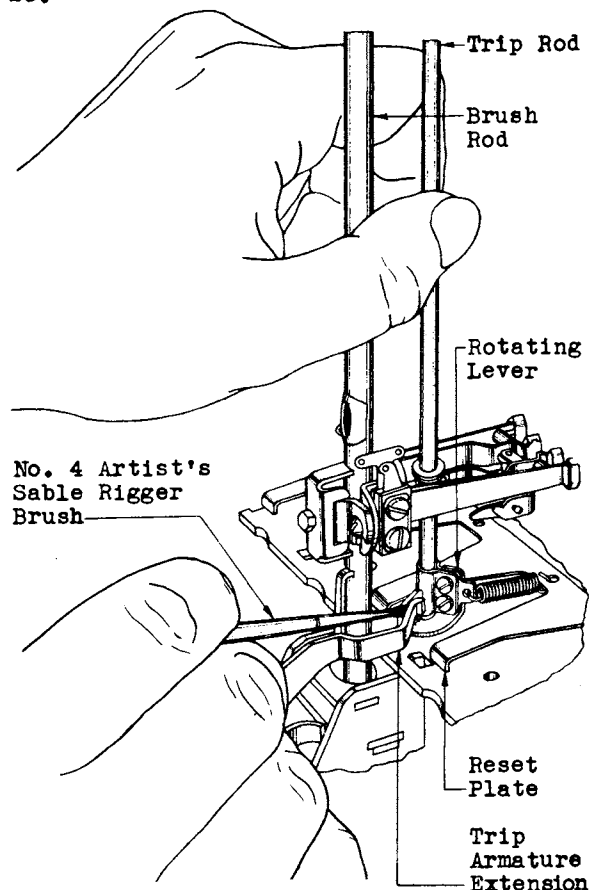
Method of Lubricating Trip Rod Rotating Levers and Trip Armature Extensions
